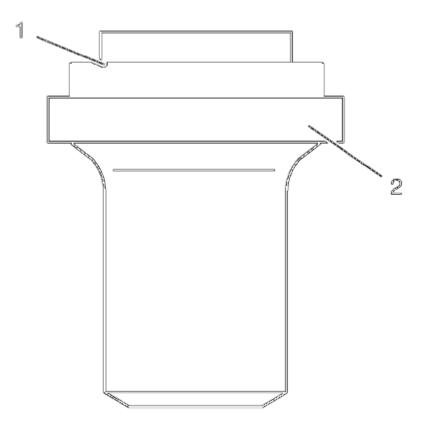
Crankshaft Front Oil Seal And Remover Courtesy of GENERAL MOTORS COMPANY
